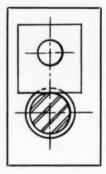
This sketch Fig. 11 — This sketch shows how a small thin piece of sheet steel, riveted to the inside of the sheet steel door, prevents the screw from falling out when the cover is opened.
